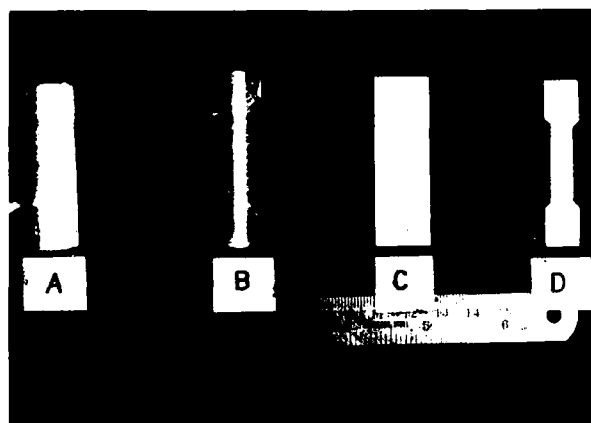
Photograph of (A) ceramic pre-form, (B) squeeze cast composite, (C) flat sectioned tensile specimen and (D) ASTM tensile specimen.
